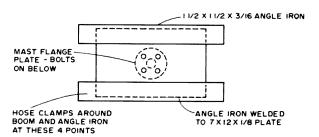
Mast to boom mount. Beam is removed from the mast by removing the four 1-1/2 x 5/16 bolts used to secure flange plate to home-brewed fixture illustrated here.
